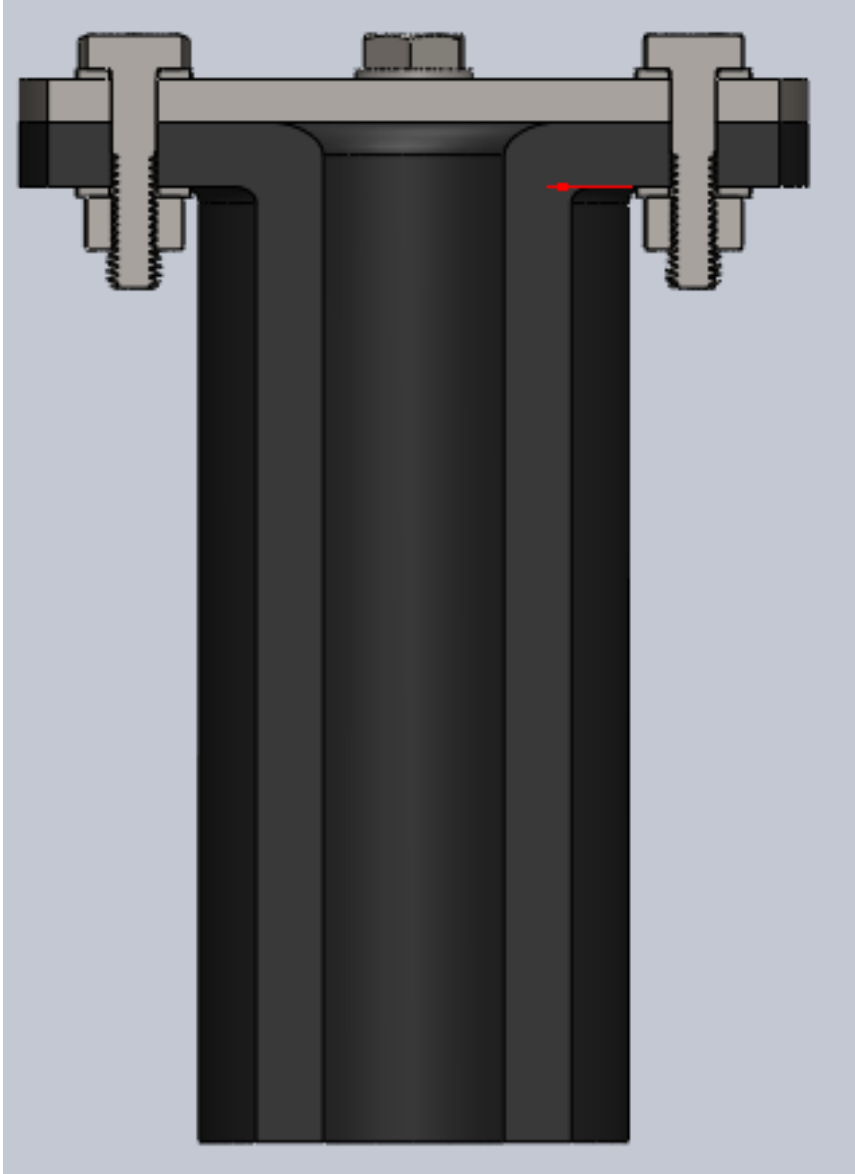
Sectioned view showing fileted cylinder and cut-out of bolt/washer/nut assembly
